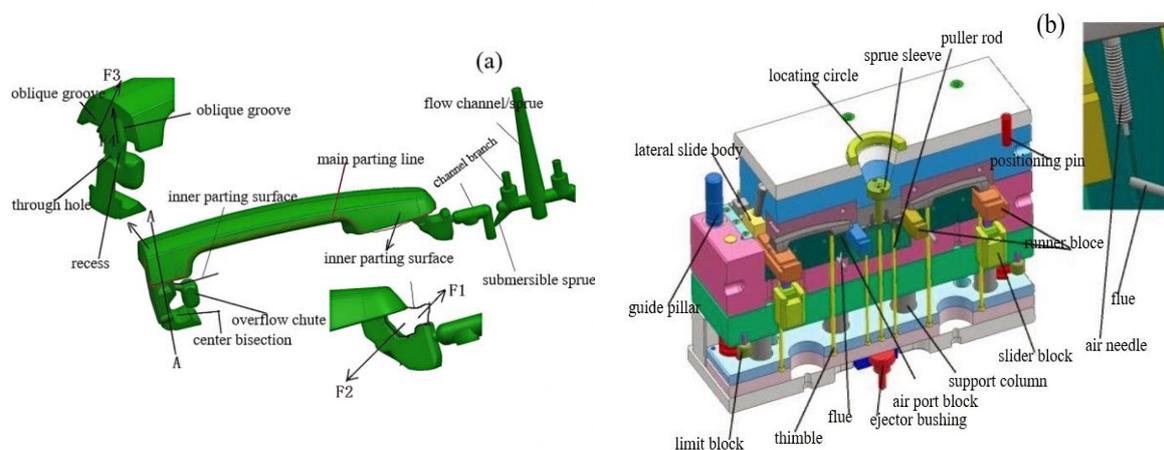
Die structure design:(a) typing setting (b) mold mechanism installation
